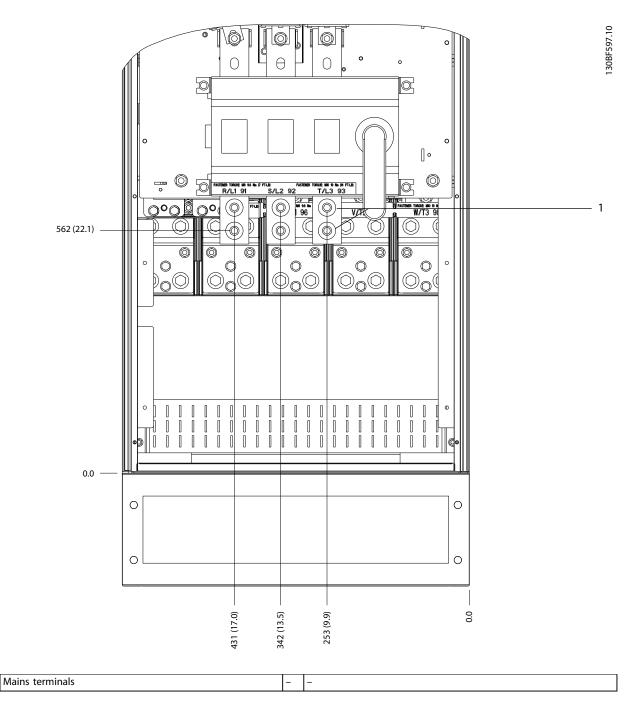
Terminal Dimensions for E1 with Disconnect (380-480/500 V Models: P315; 525-690 V Models: P355-P560), Front View
